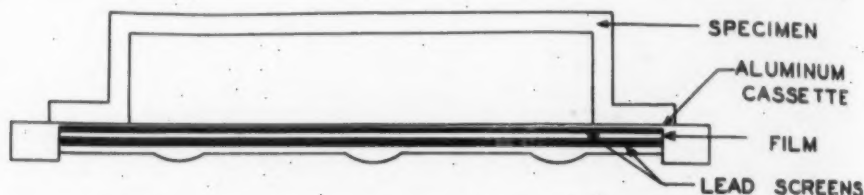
Set-up for Thin Aluminum or Magnesium Specimens.
